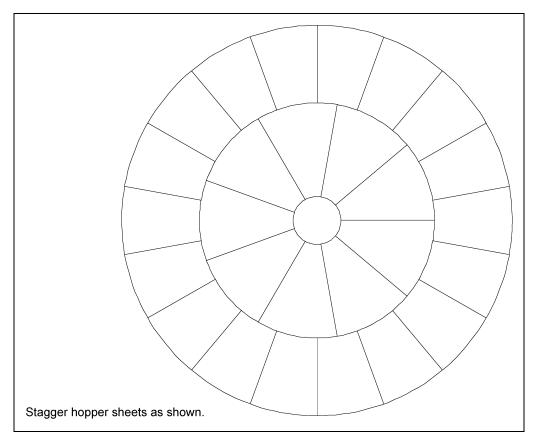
B 15' 60° Two Piece Hopper Overhead View of 15' 60° Hopper Sheet Assembly
